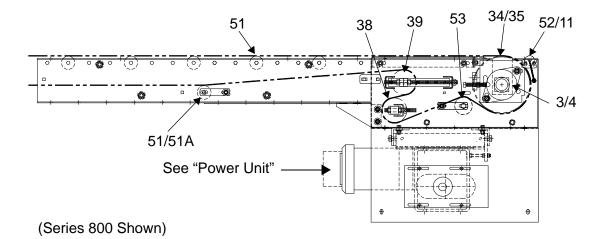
End Drive - Series 600 and 800 with Take-Up
